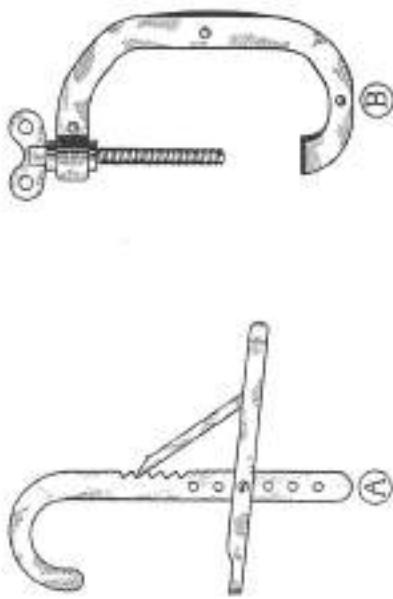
REMOVABLE VALVE SPRING COMPRESSORS FOR J.A.P. ENGINES
